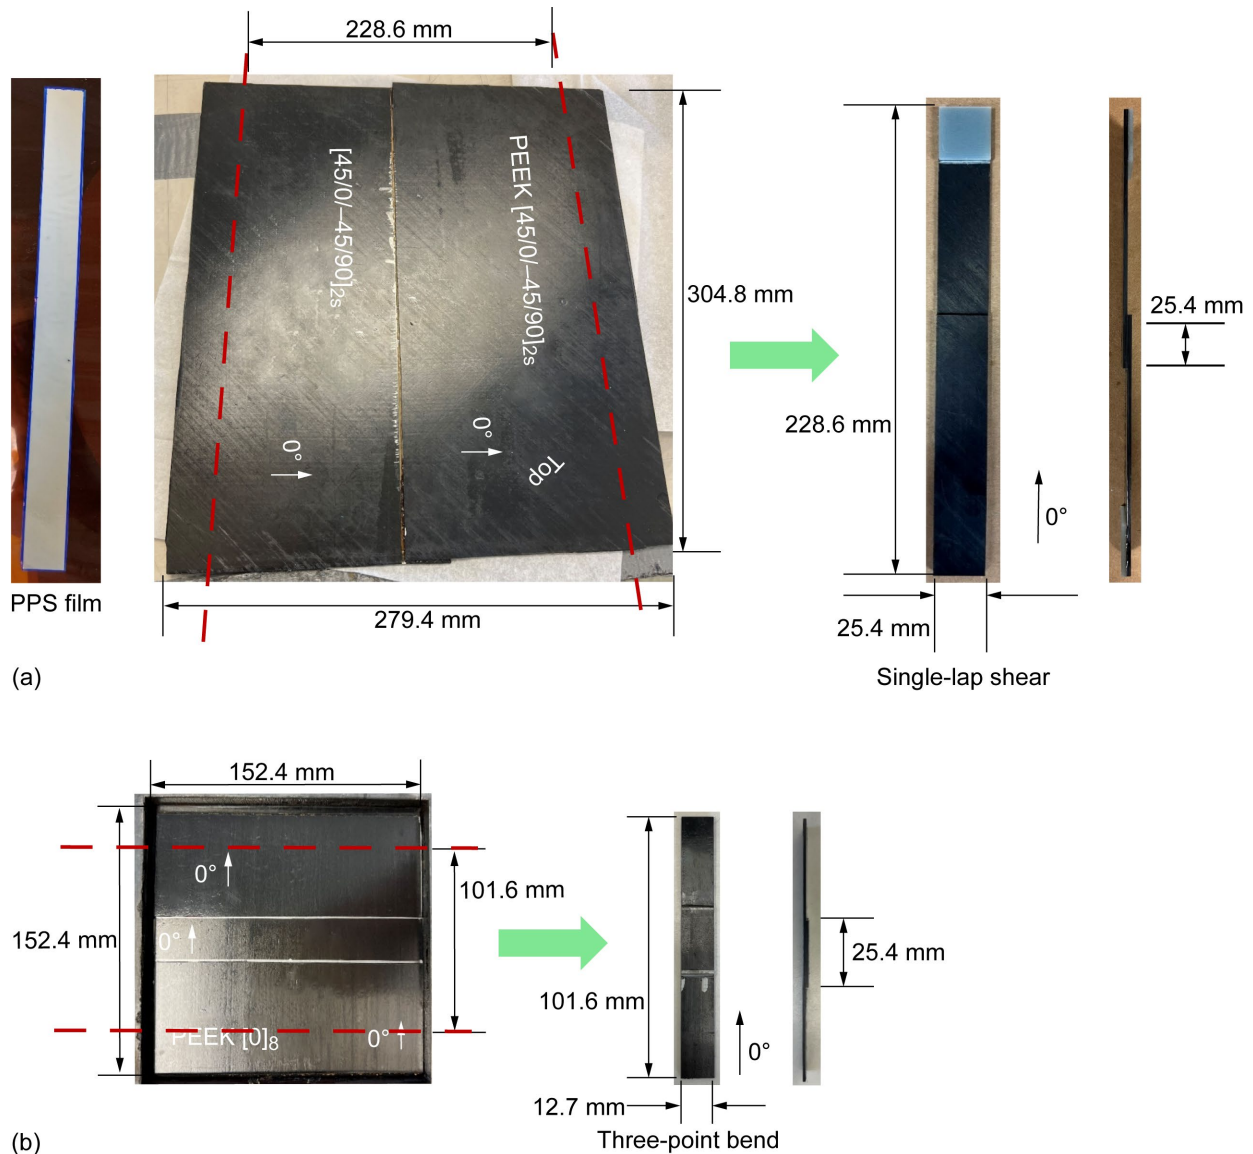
Manufacturing and joining process for specimens of PEEK adherends with PPS interlayer composite joint specimens. (a) SLS joint. (b) Three-point bend joint.
